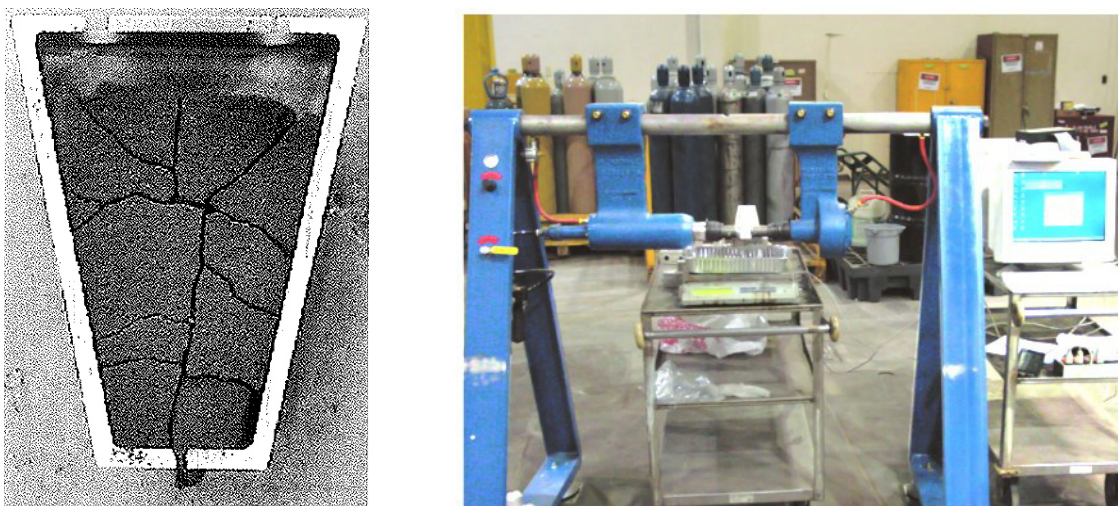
left: A cut test specimen after initial hammering, showing the fractured core [122]. Right: shake-out tests system with hammer and an in-line scale for sand collection [124].
